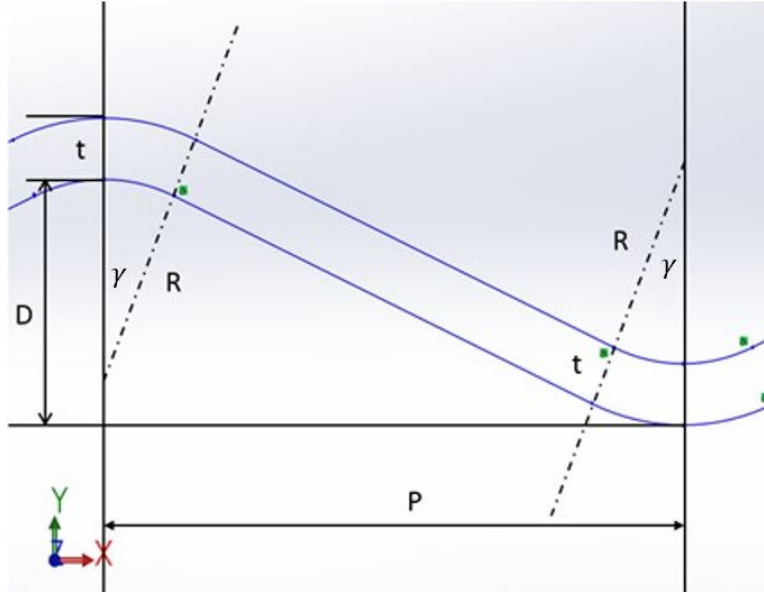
Schematic drawing of the half channel of preform forming toolset in Solidworks.
